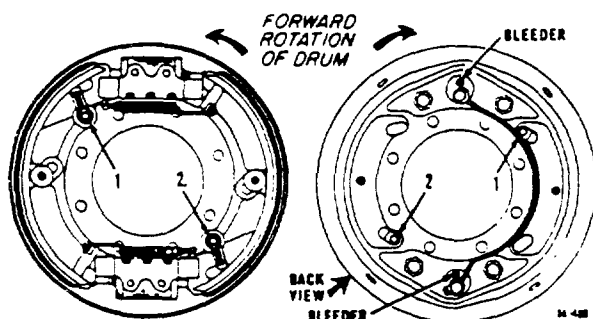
Outboard and Inboard Views of Left Rear "FR" Brake
